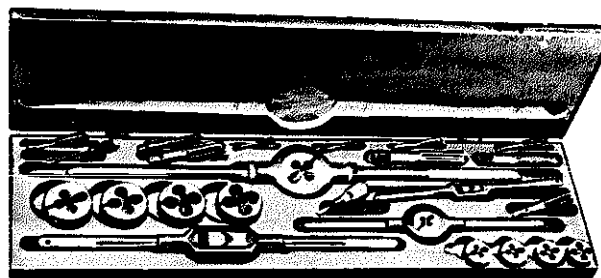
Bolt and screw threading diestocks, adjustable split dies, taps, and tap wrenches.
